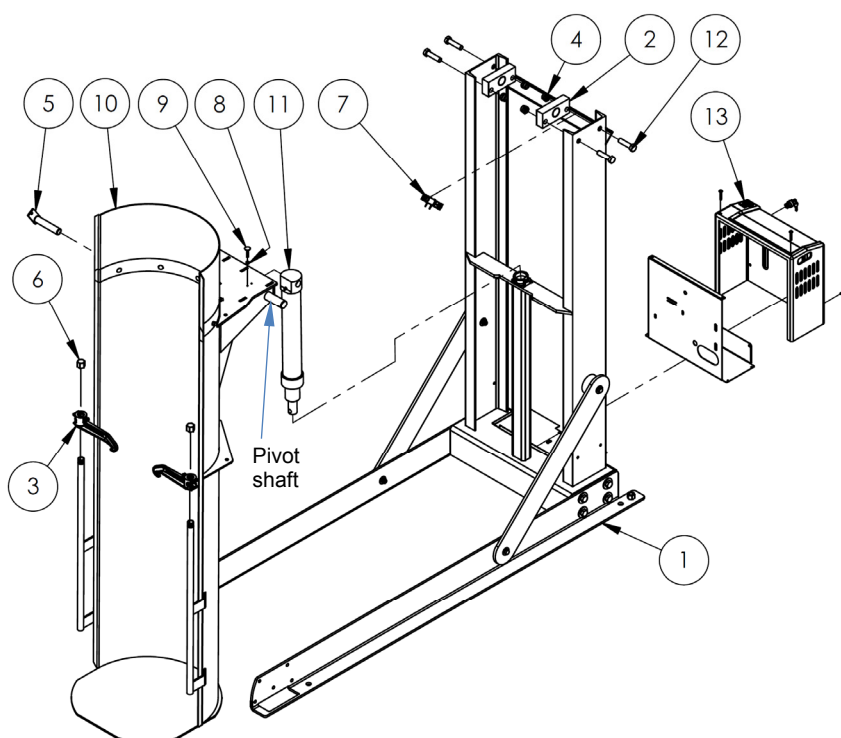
HDD-48-S series stationary dumpers exploded parts diagram and bill of materials
